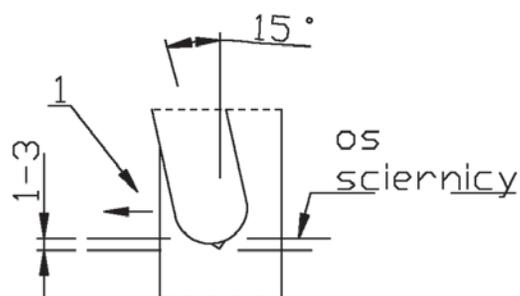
and 2 present the correct position of the dresser and diamond stone in relation to the surface of the wheel being dressed.
